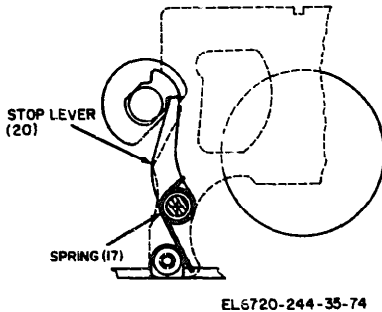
Spring location (spring (17) from fig. 3-11).
